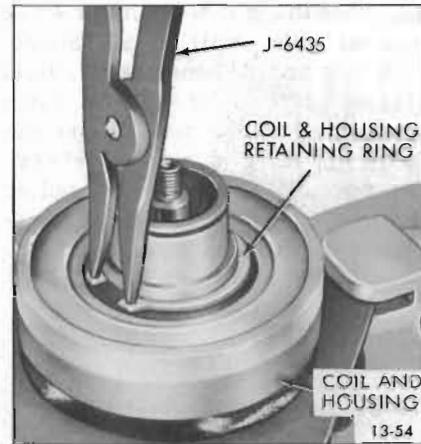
Removing and Installing Coil and Housing Retainer Ring
